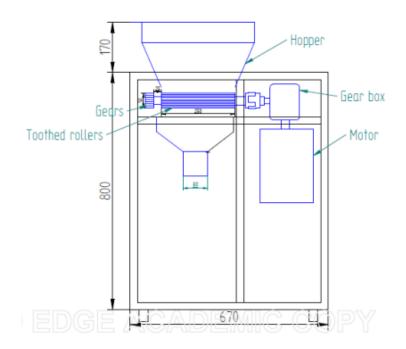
Line diagram of the cocoa bean sheller (final model) (all dimensions in mm)
